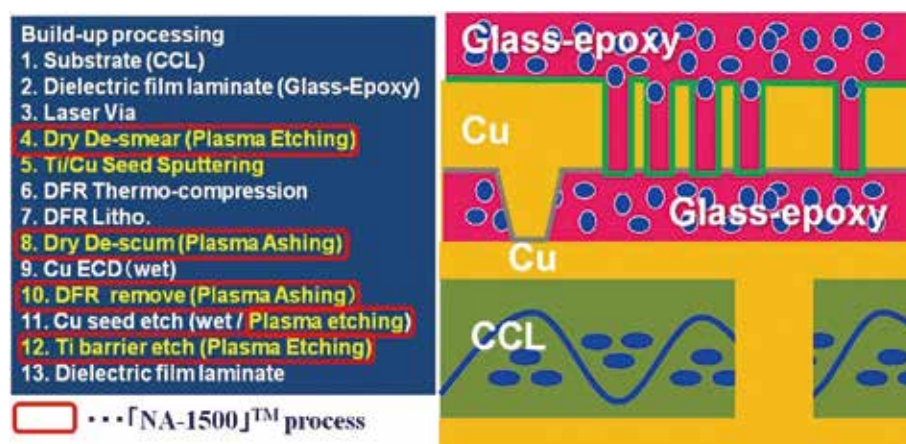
“NA-1500”™ Process in the Build-up PCB.
